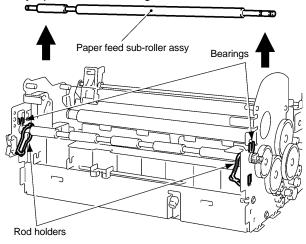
Removing the Paper Feed Sub-roller Assy
